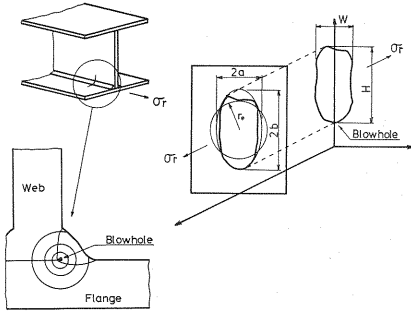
Model of fatigue crack growth from blowholes in longitudinal fillet weld of welded beams.
